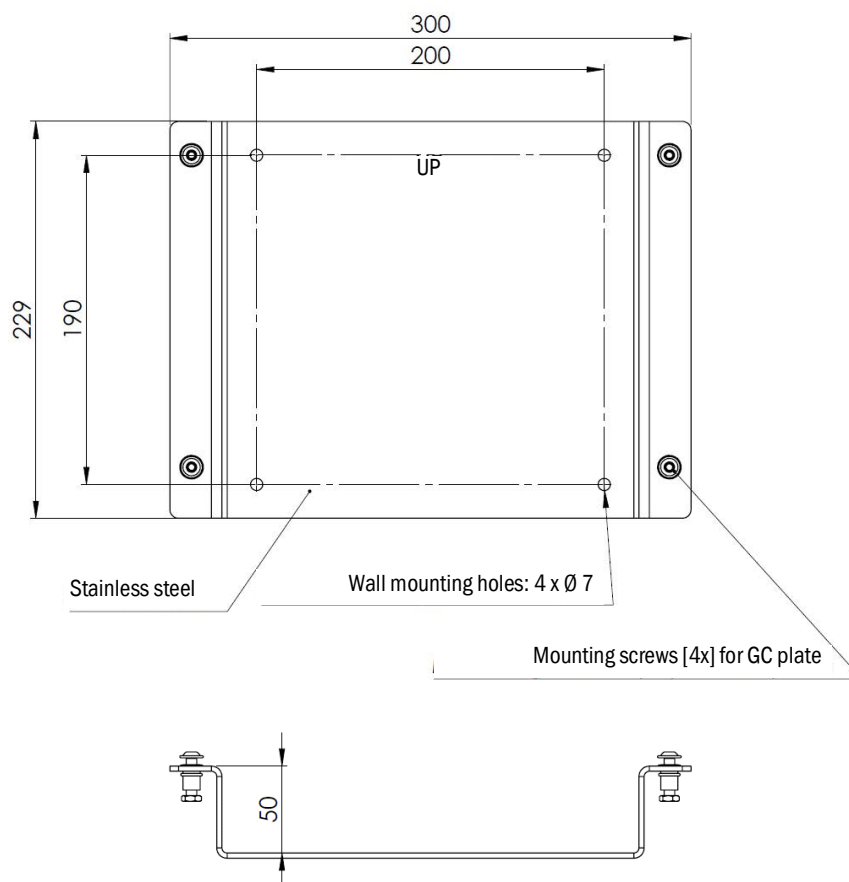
Optional mounting wall plate (dimensions and mounting)
